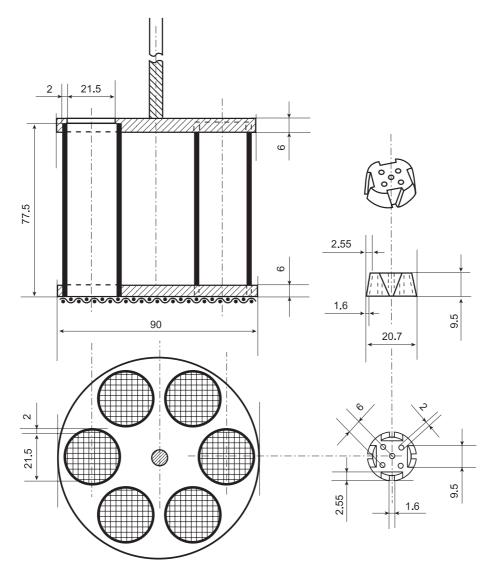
1. – Apparatus A Dimensions in millimetres
